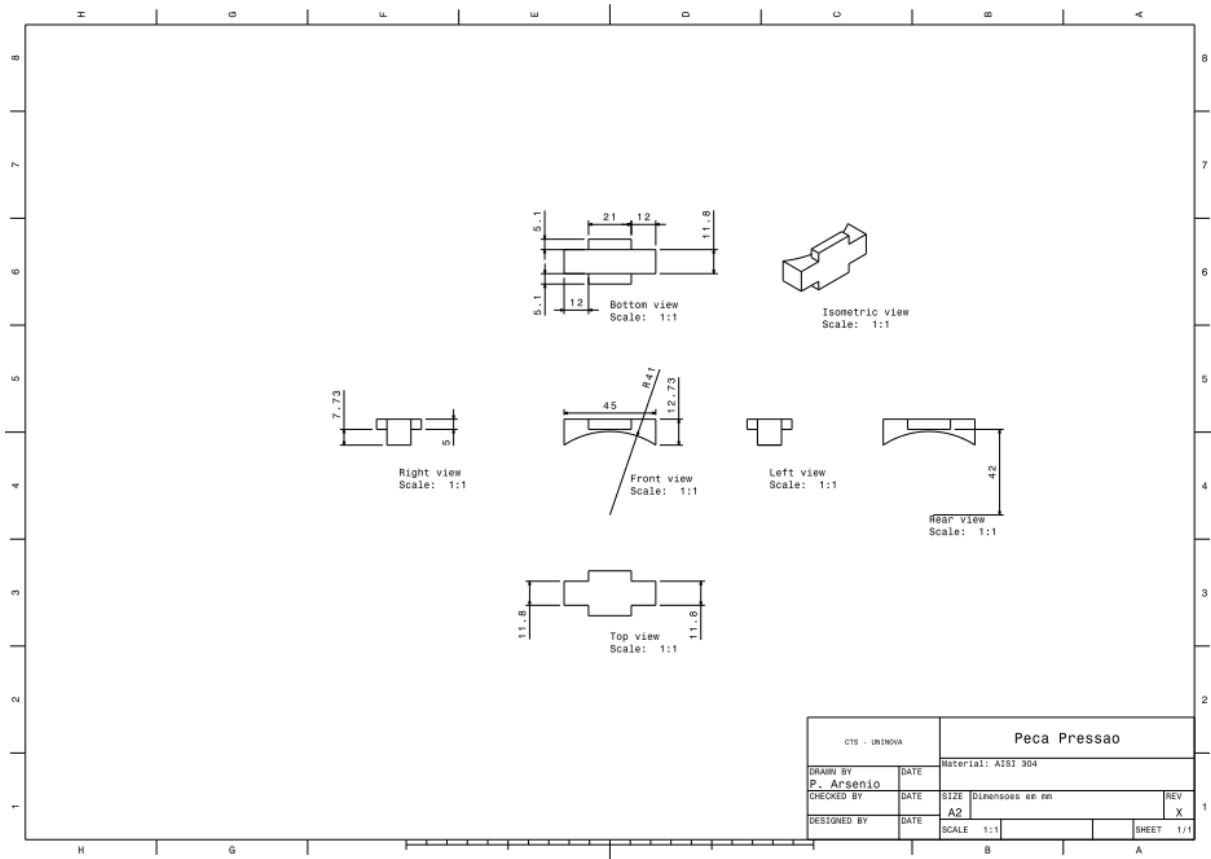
Dimensions, in mm, of the pressure piece of the stainless-steel holder (not to scale).
